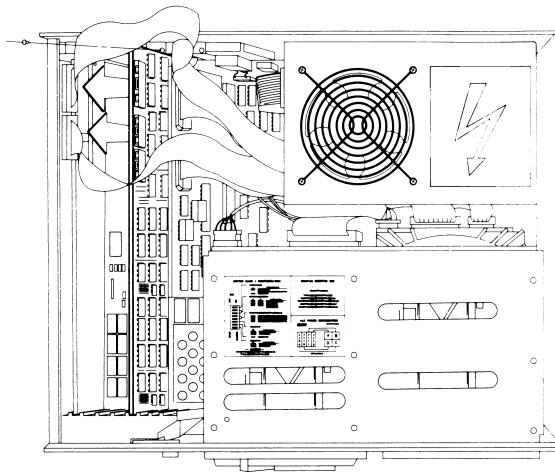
Removing the ESDI Fixed Disk Drive Controller Board Signal Cables.
